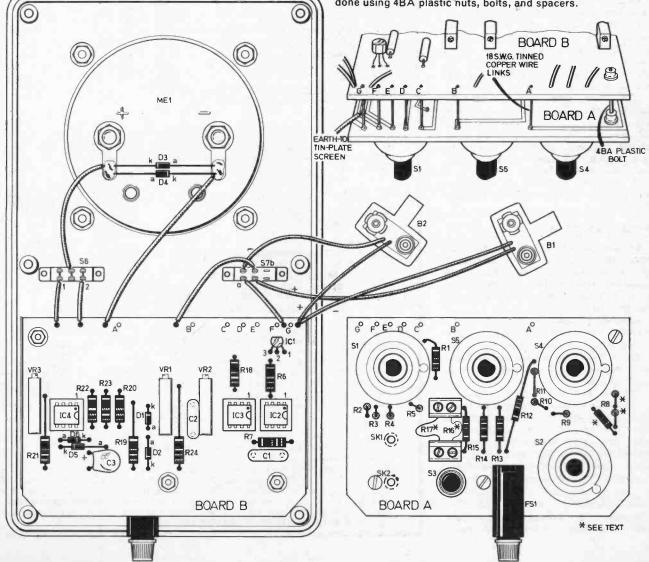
(below) Component layout for board B and interwiring to certain off-board components,
